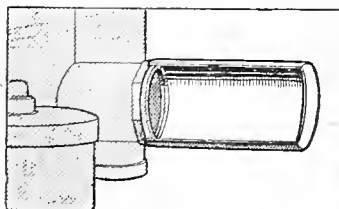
Scoop attached to the carburetter to prevent wire-drawing of the charge.
